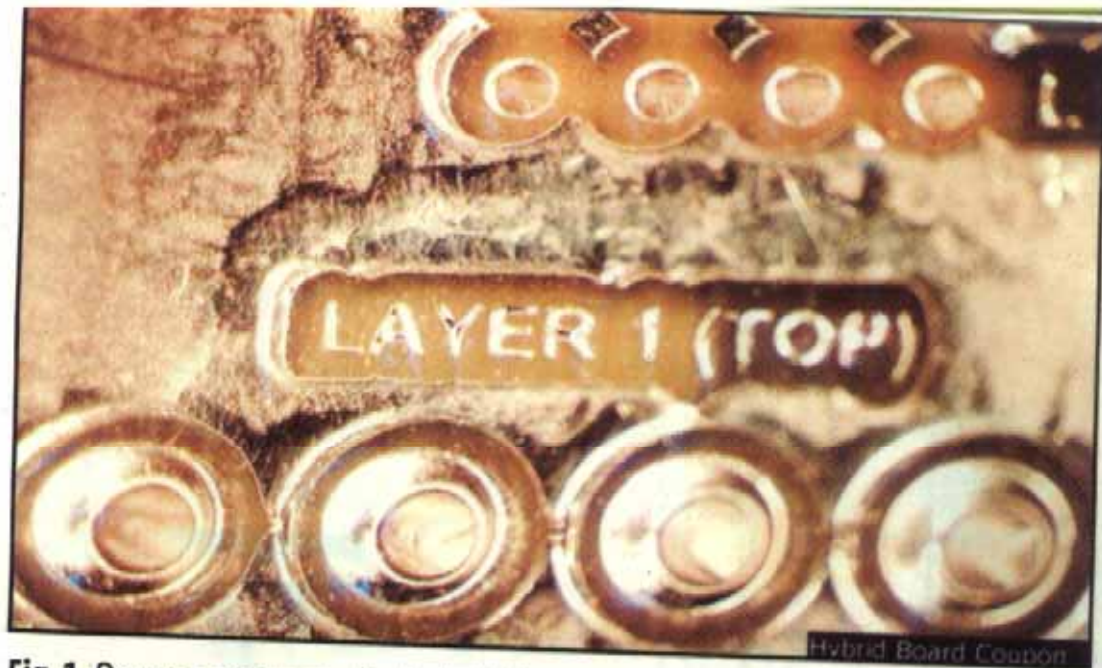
Process coupon of a hybrid thick/thin copper printed wiring board (solder coated).
